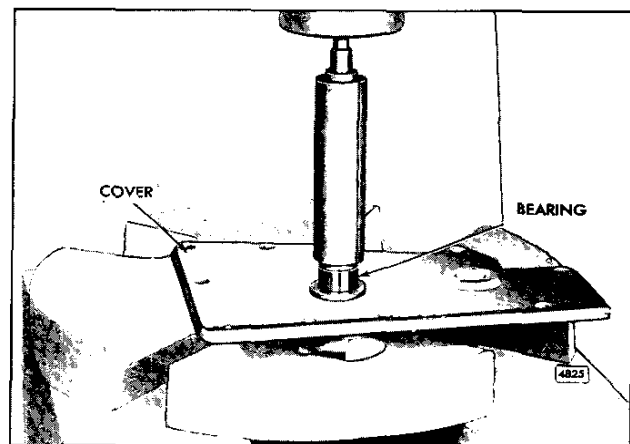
Installing Bearings in Governor Cover Using Tool J 21068
